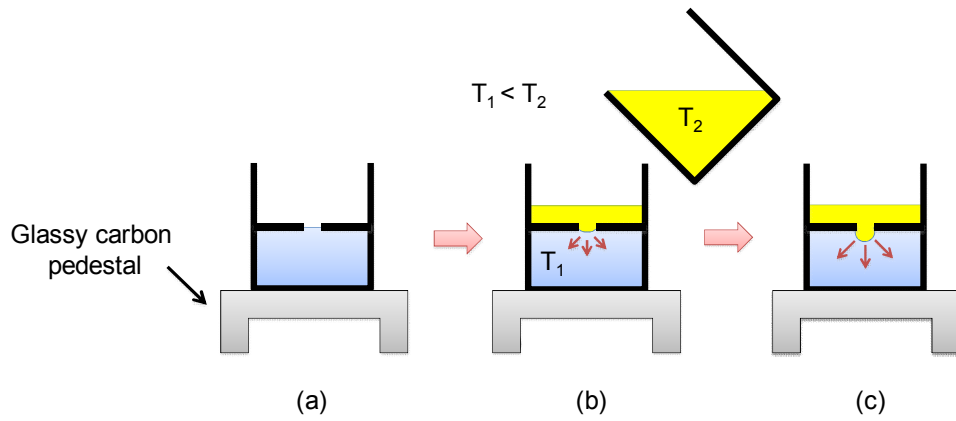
Casting core glass melt on the cladding glass with glassy carbon disk which have 5.0 mm diameter center hole.
